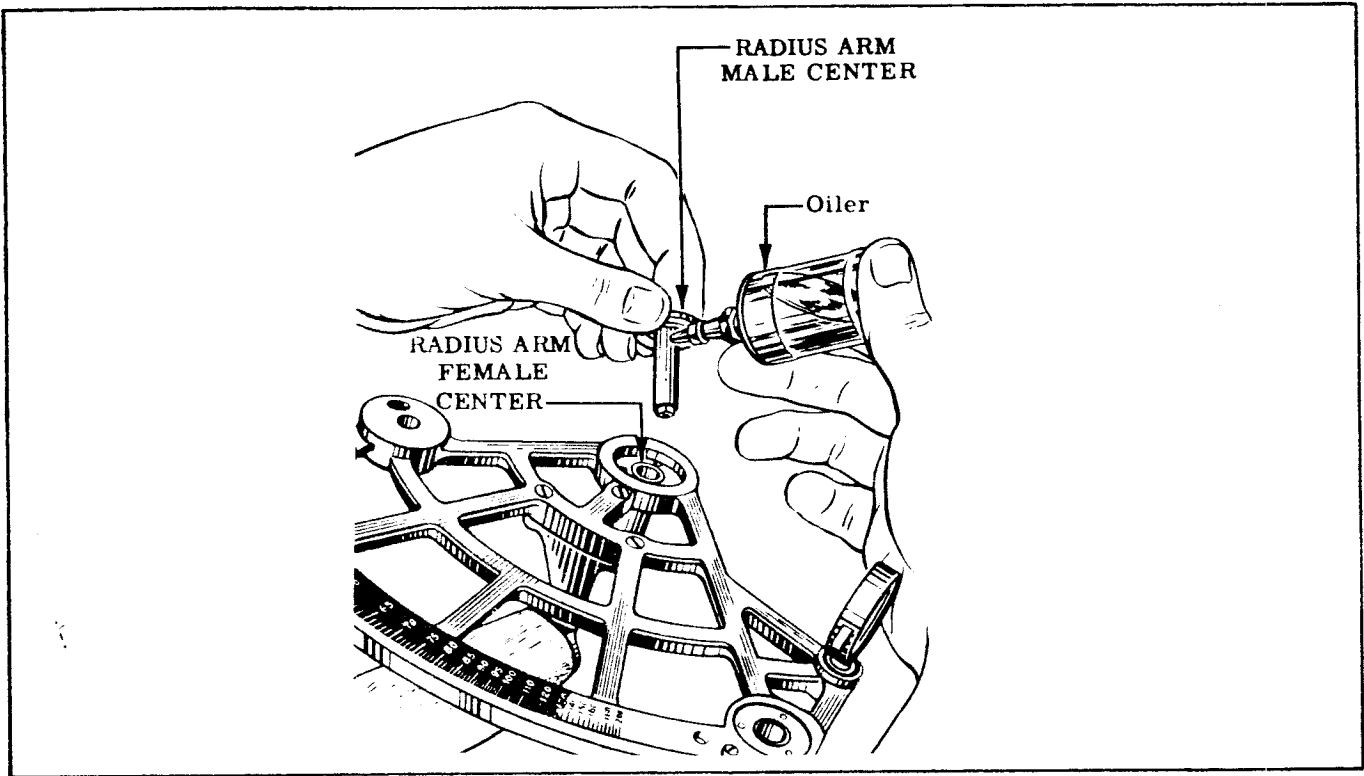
Assembling the Arcuate Arm Female Center and the Radius Arm Center
